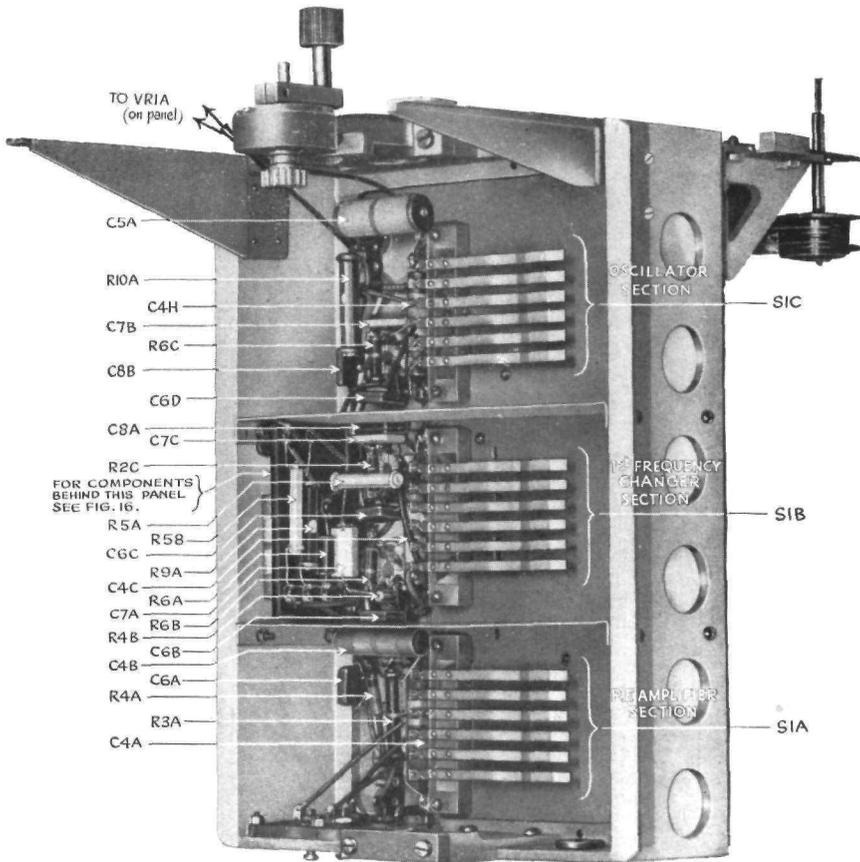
TOP VIEW OF R.F. CHASSIS (Turret Removed).
